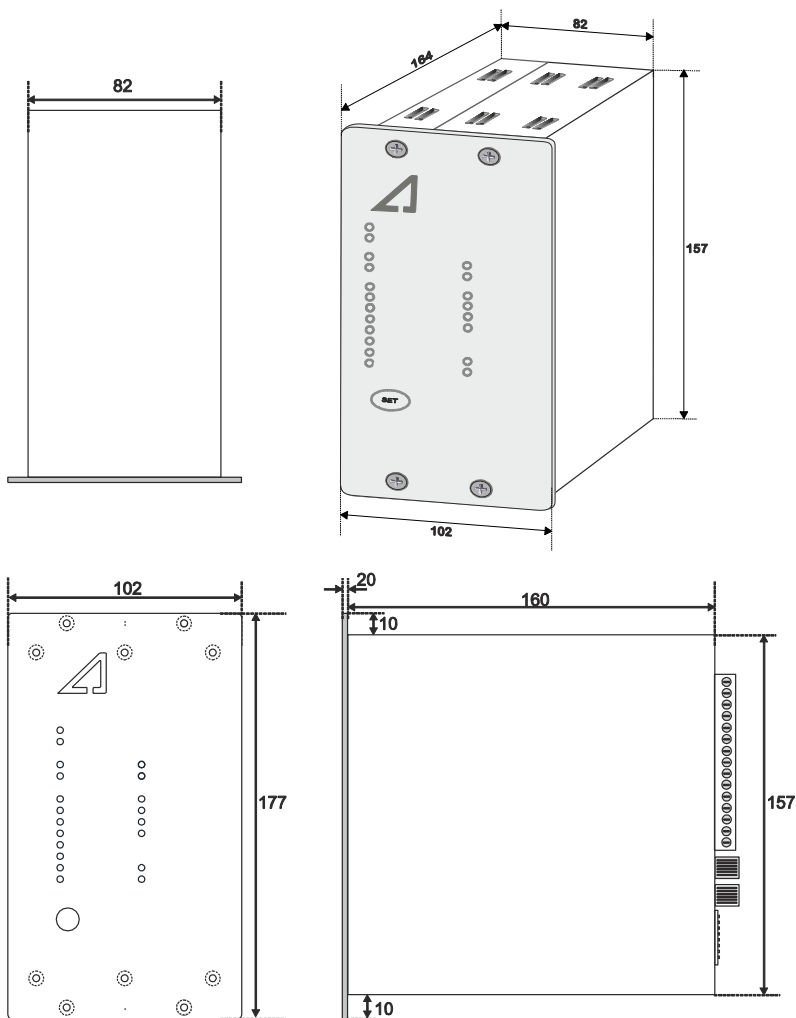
AQ110P device dimensions, all dimensions in millimeters.
